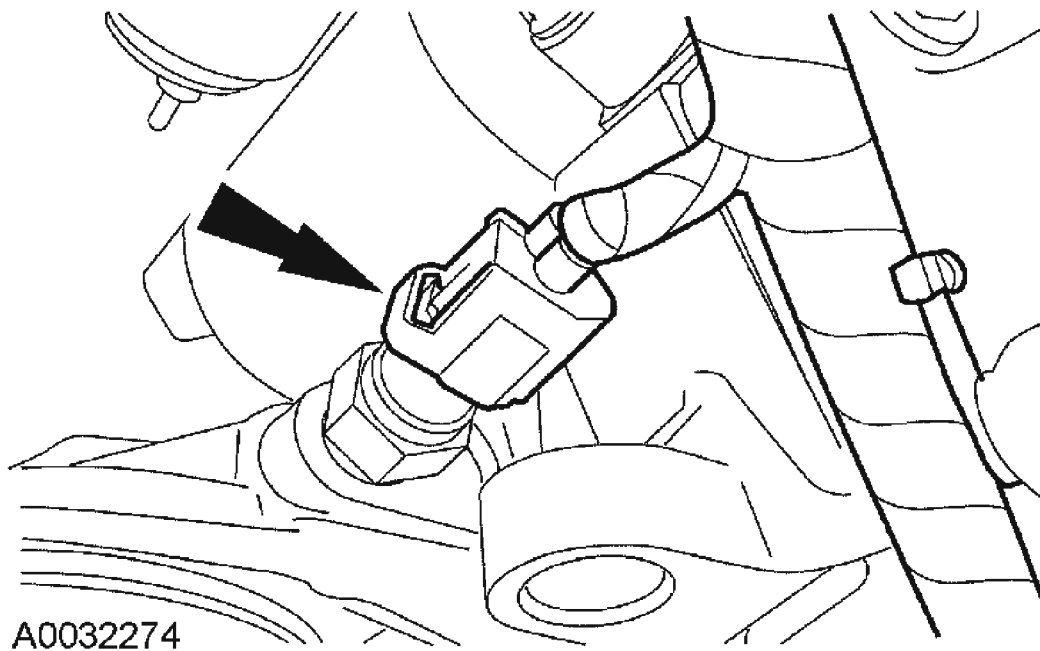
Disconnecting Oil Pressure Sender Electrical Connector
